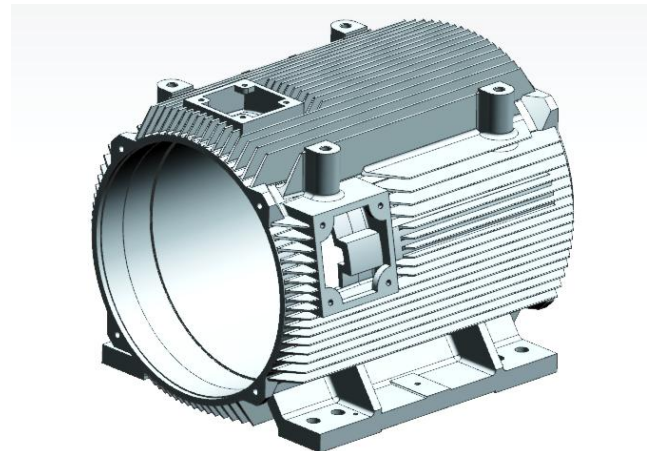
Shows the optimized frame of 315L motor for 160 kW 4 pole motor.
